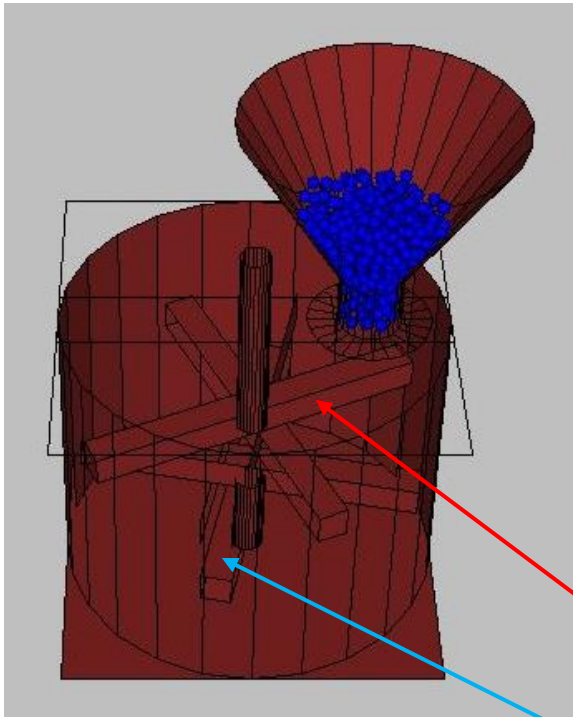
Double rotor impeller design with a bottom and upper impeller
